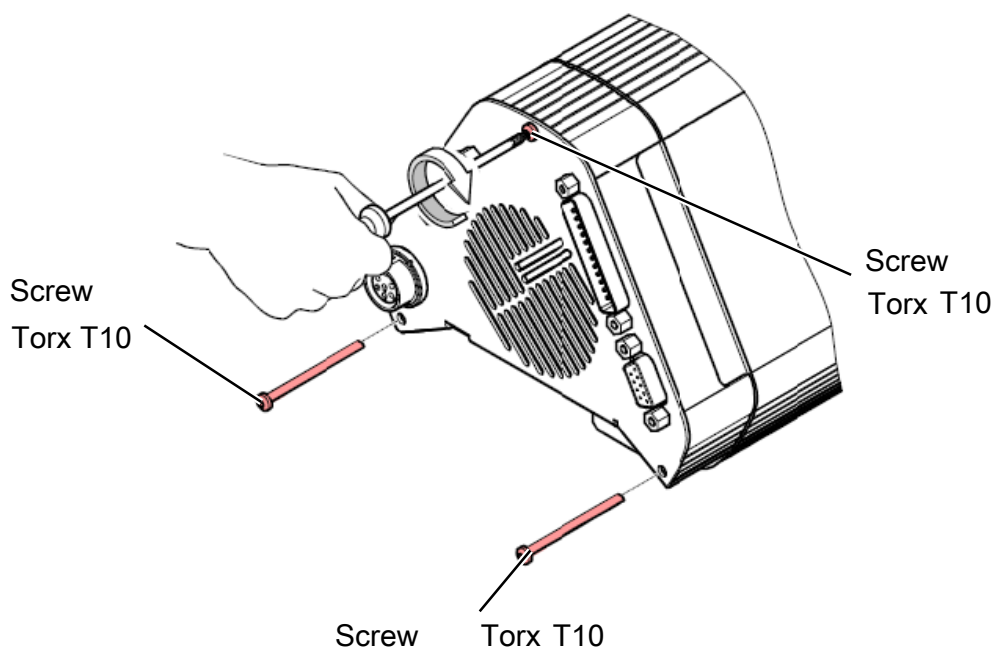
CHLD-Sensor: Remove the IO 220 module
